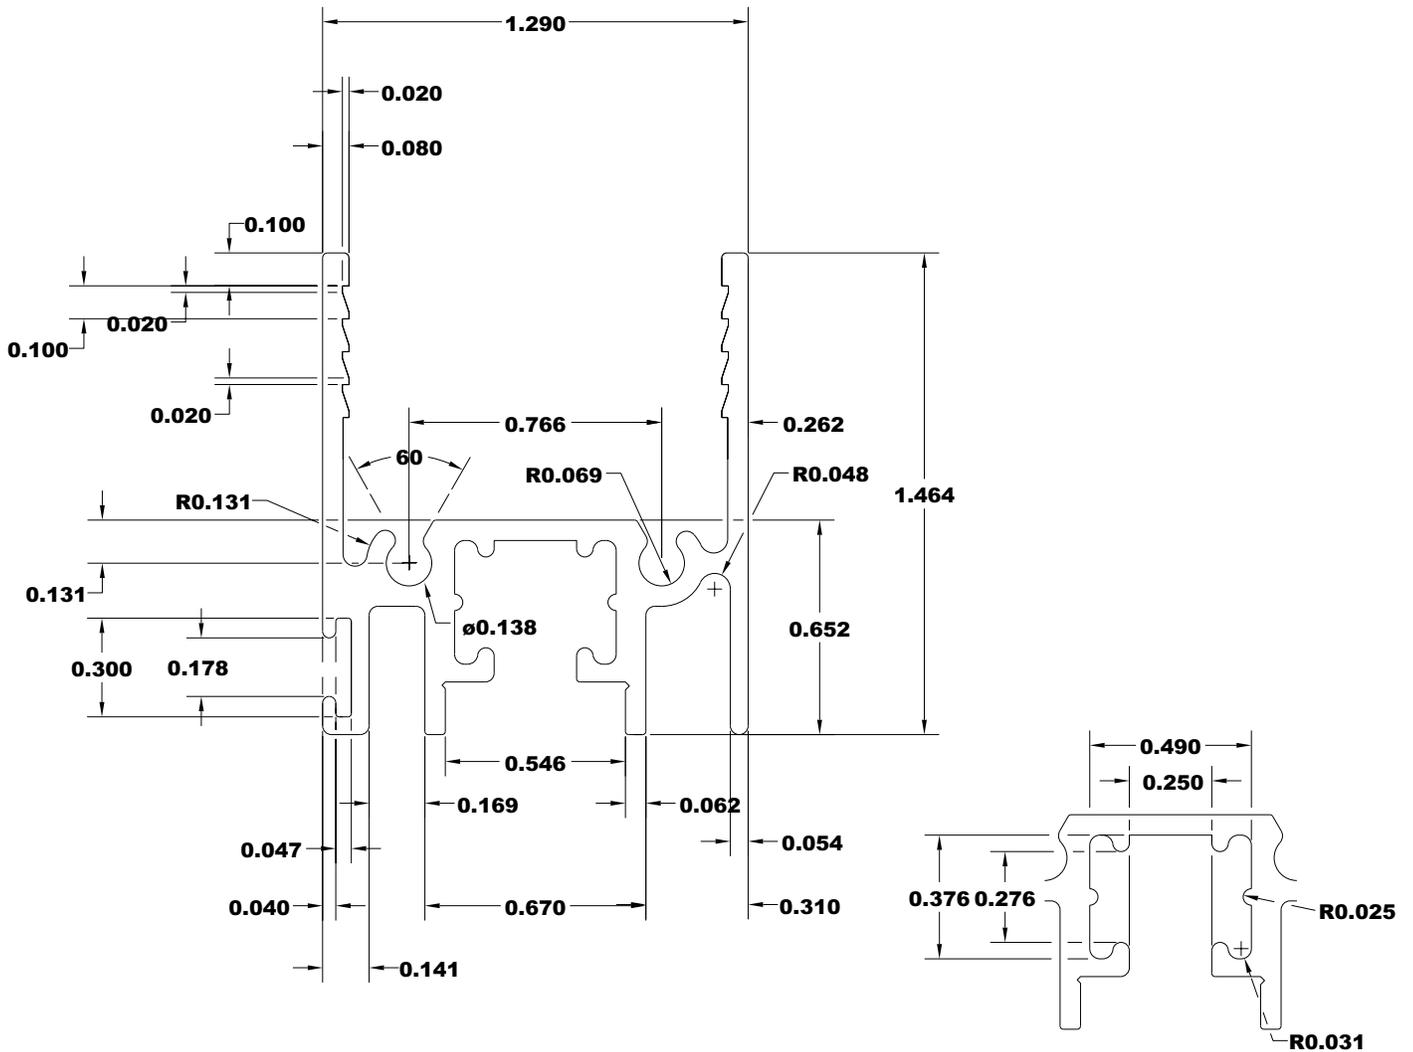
Stile-Fixed Drawing for Horizontal Aluminum Slider.
